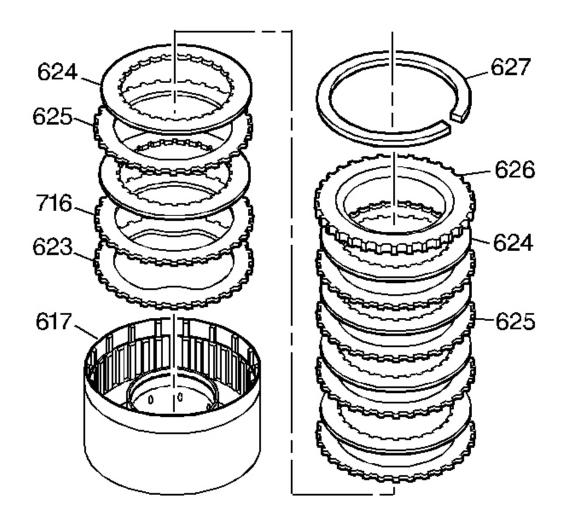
View Of Second Clutch Plate Assembly Courtesy of GENERAL MOTORS CORP.
